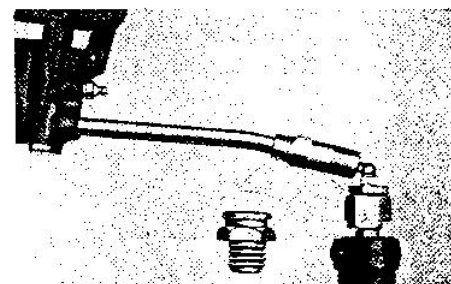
6594 Gun and 6832-A Adaptor used on Button Head Fitting.
